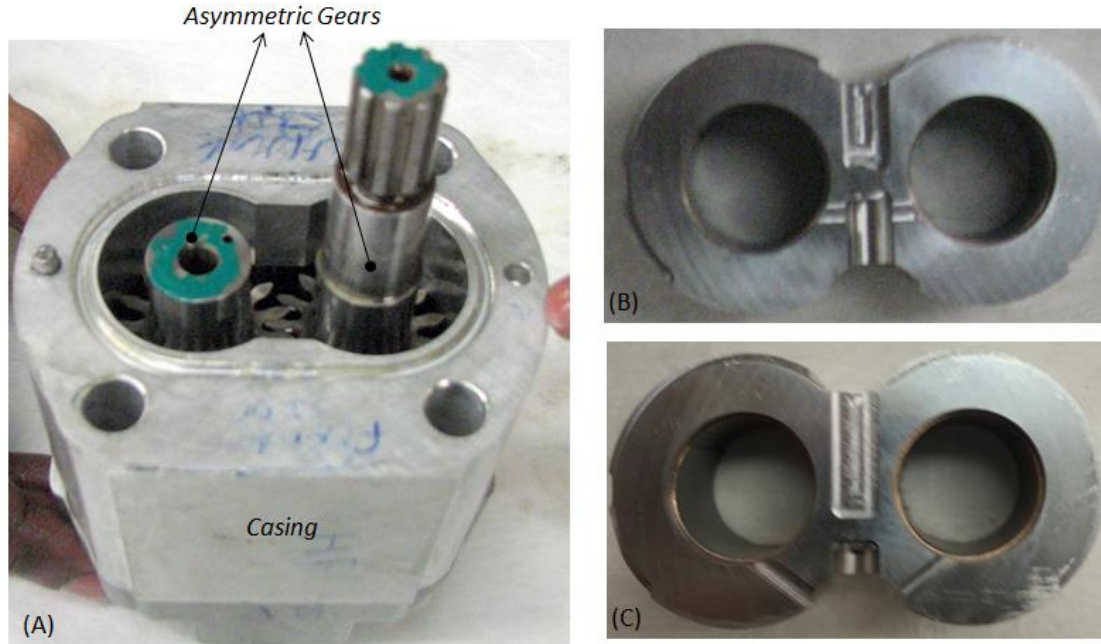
Prototype optimal gears assembled within the commercial casing; (B) Lateral bushings with grooves for max (100%) displacement; (C) Lateral bushings with grooves for min (68%) displacement.
